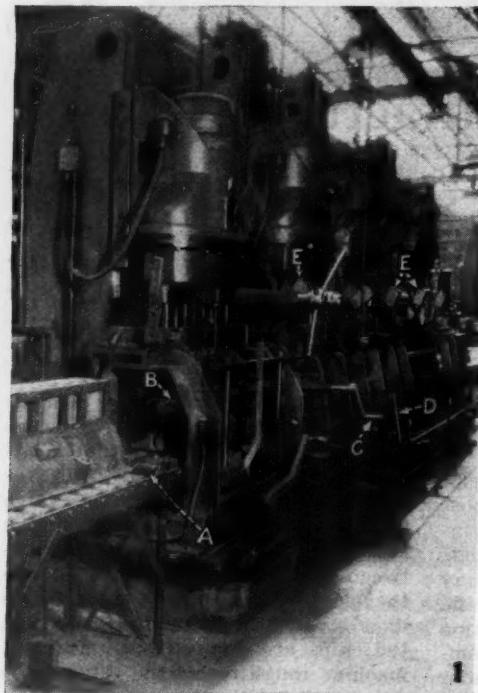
Automatic loading and automatic operation of machines makes it possible for one man to operate this entire line of machines.
